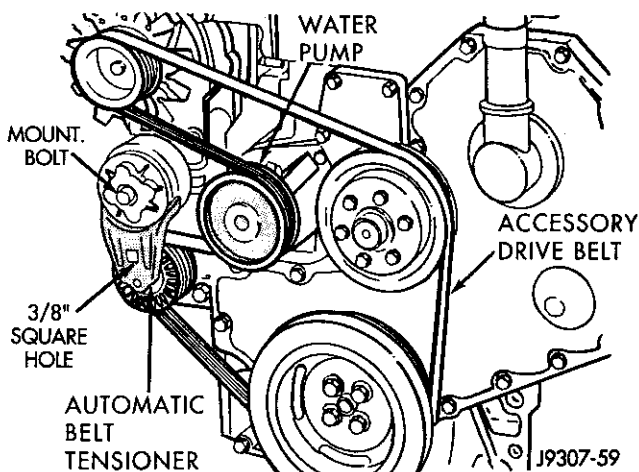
Belt Tensioner—5.9L Diesel—Typical (non-A/C shown)
